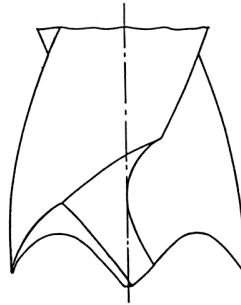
Drill geometry for aramid fibre cutting [74].
